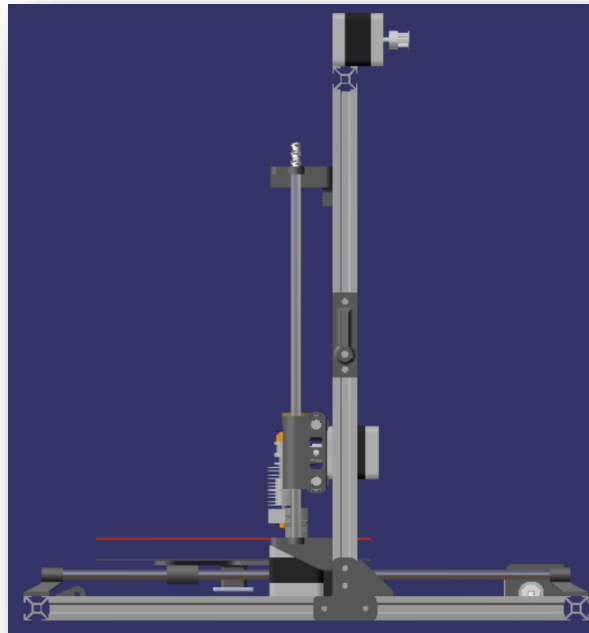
Side view of a Two – Axis Computer Numerical Controlled Foam Cutting Machine
